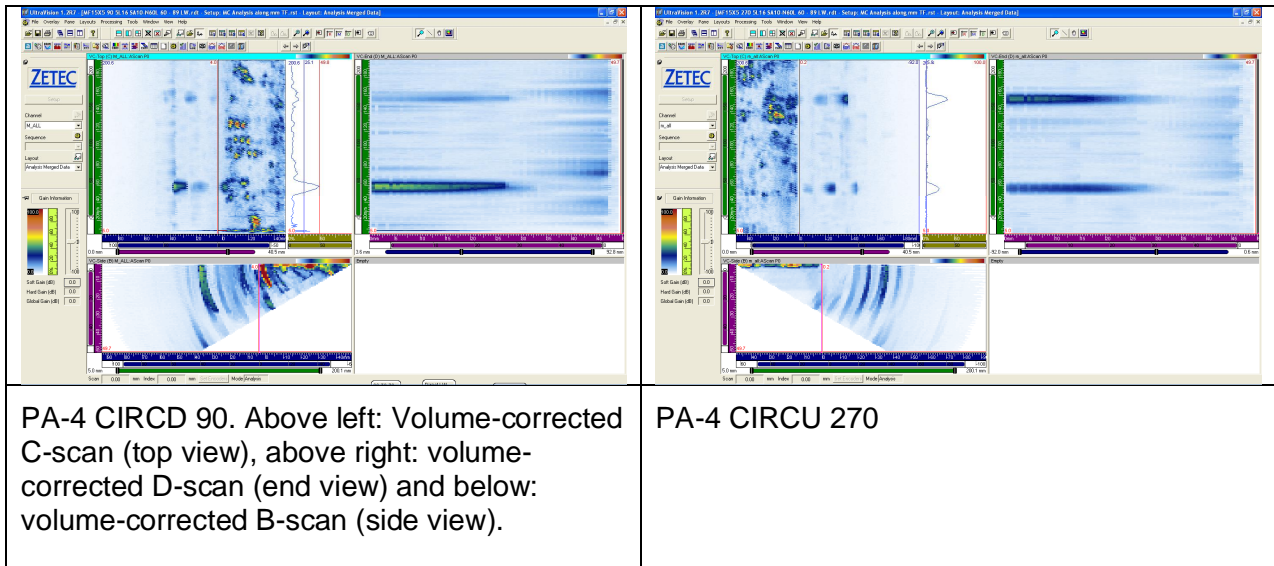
General views of weld TF scanned with technique PA-4.
